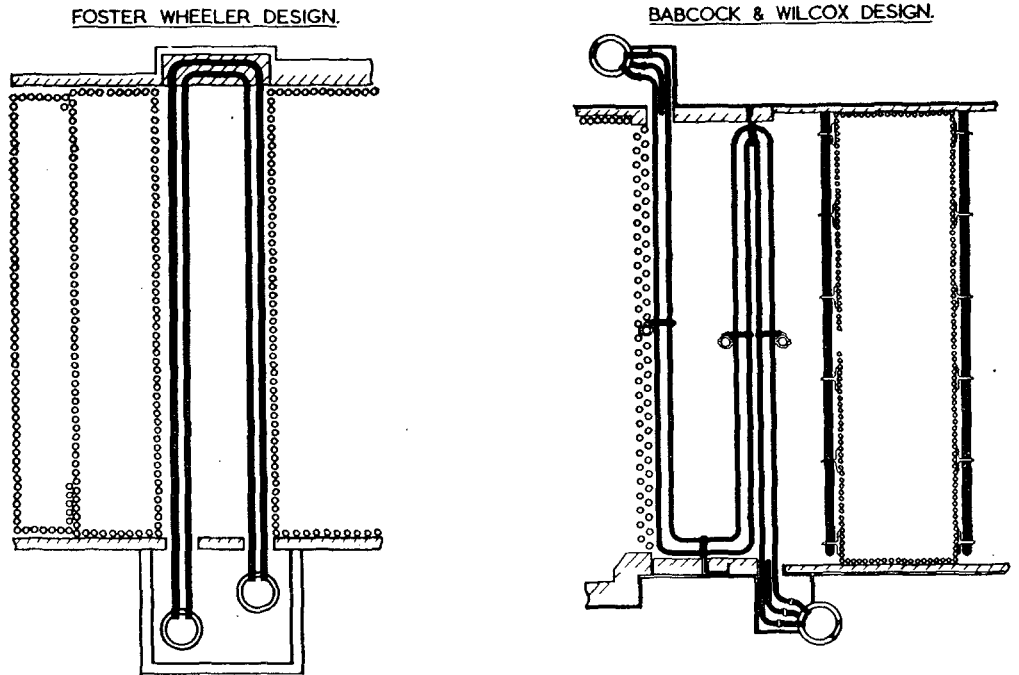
PARTS OF (SKETCH) DESIGN FOR BOILERS FOR A NEW CARRIER
